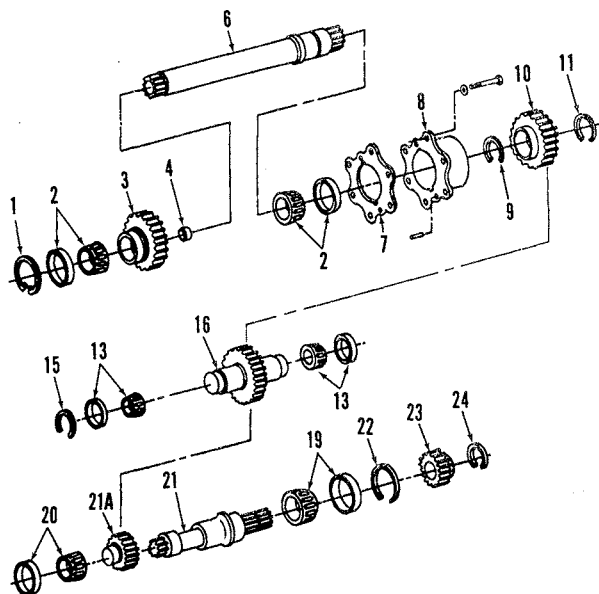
A—Exploded view of mechanical front-wheel drive power train used on 4650 and 4850 Power Shift models. Refer to Fig. 178 legend except for gear (21A).
